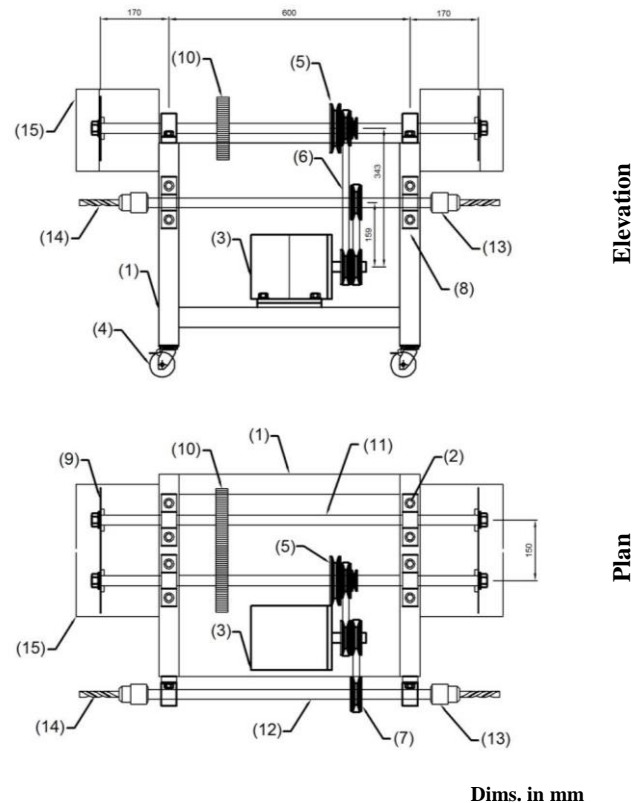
Constructed trimming machine: 1- Machine base. 2- Bolts and nut. 3- Motor. 4- Bearing. 5- Multi-Pulley. 6- V belt. 7- Single-Pulley. 8- Bearing housing. 9- Circular knife (160 mm diameter). 10- Spur gear (160 mm diameter). 11- Main shaft. 12- Side shaft. 13- Drill chuck. 14- Twist drill (Left and right). 15- Cover.
